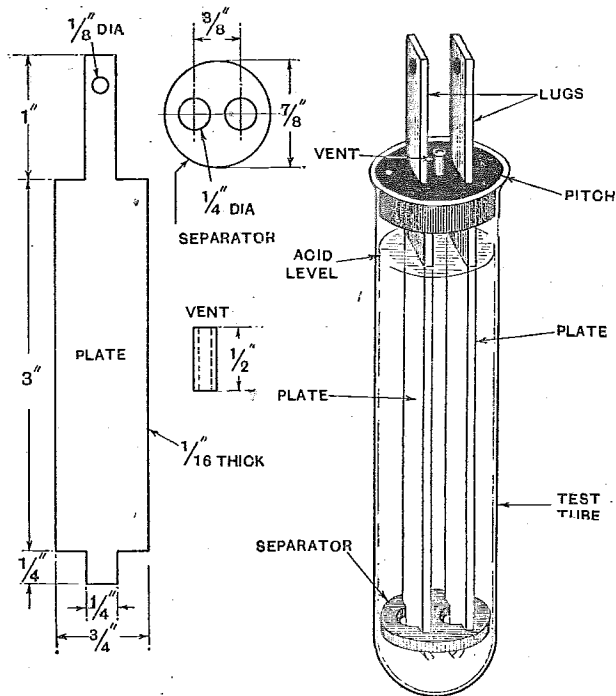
Sketch of a completed cell, and the dimensions of the parts.
